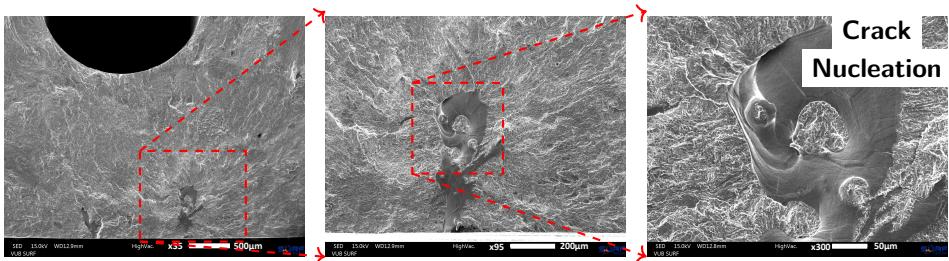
SEM images of the fracture surface of Specimen 14 (AM material with drilled capillary). The fatigue crack initiated from a large (sub-) surface defect at the bottom of the sample.
